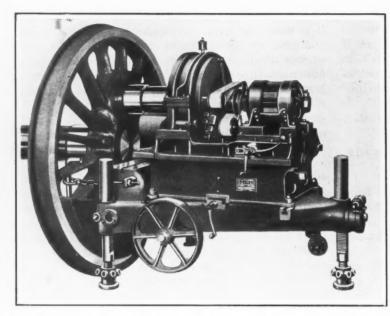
Ready to Grind the Crankpin of a Locomotive Driving Wheel with a Portable Crankpin Grinder
